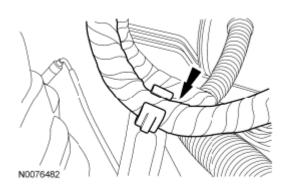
Locating Starter Wire Harness Electrical Connector Courtesy of FORD MOTOR CO.
